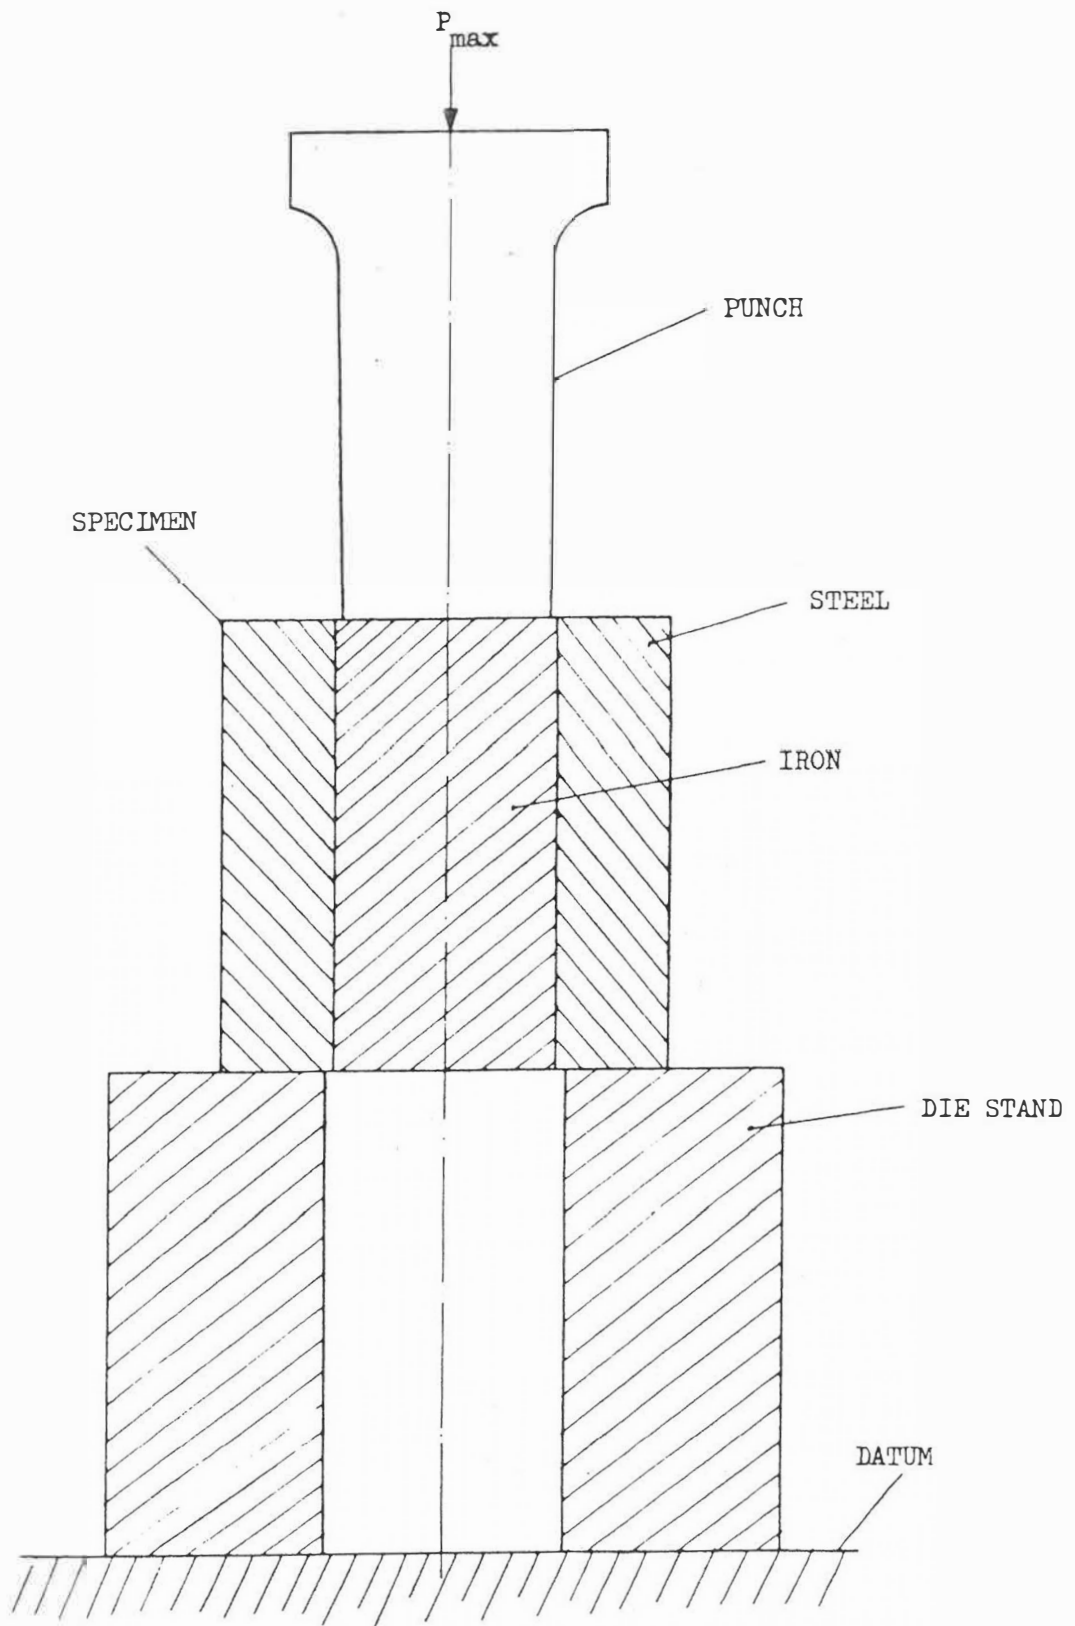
SHEAR TEST DIE SET ARRANGEMENT.
